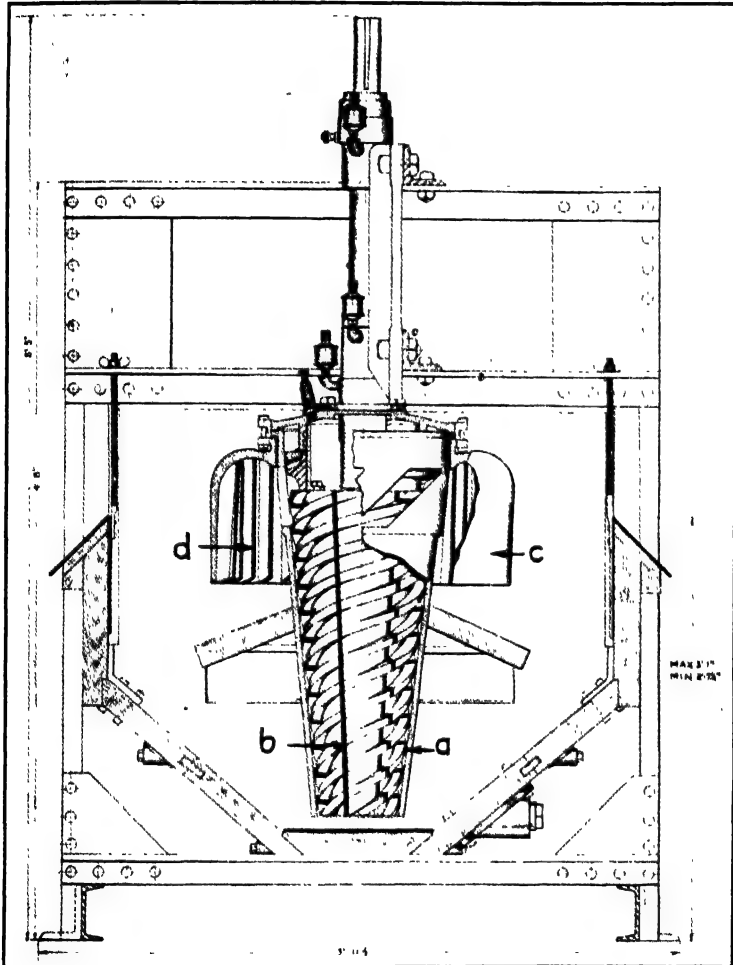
Kraut machine. (*Pan-American Engineering Corp.*)
